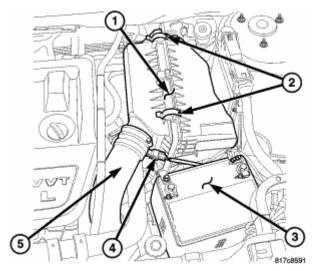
AIR CLEANER HOUSING Courtesy of CHRYSLER LLC
